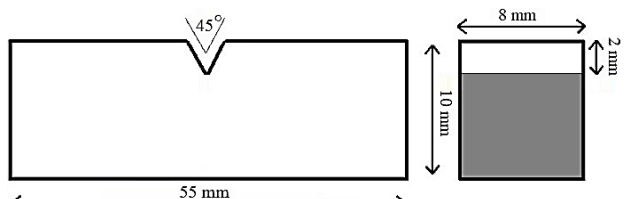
Dimensions for Charpy V Notch test (ASTM E23-82)
